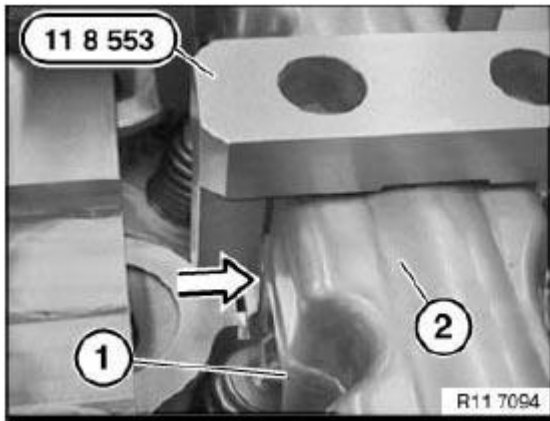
Identifying Lower Bearing Bank And Upper Bearing Bank
